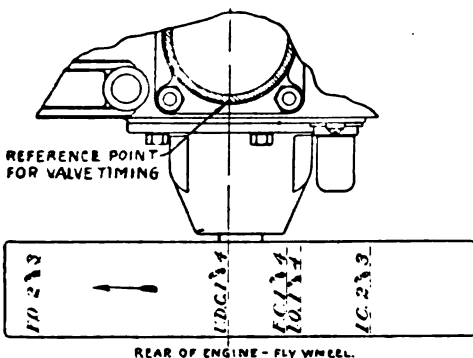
Valve timing marks on fly wheel of a Reo four cylinder engine.
